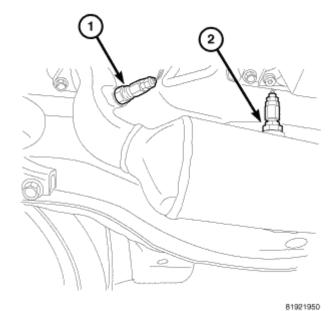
Right Side O2 Sensors Courtesy of CHRYSLER LLC
